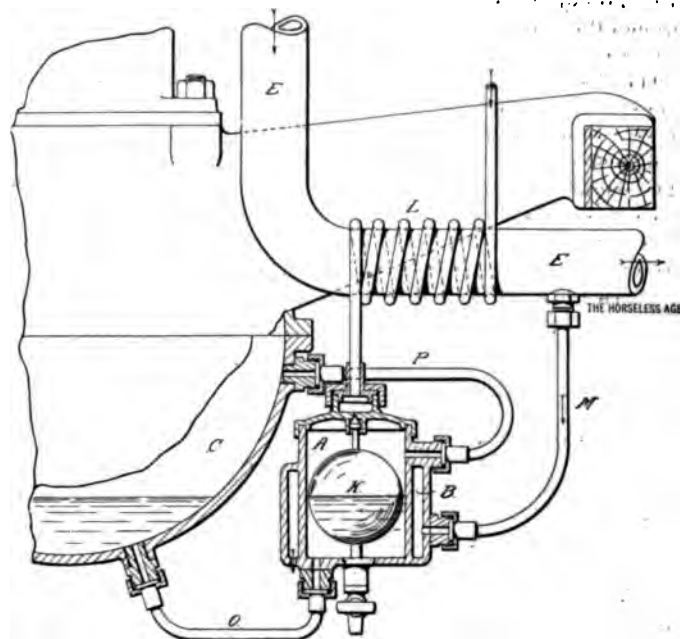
"BELGICA" AUTOMATIC LUBRICATING ATTACHMENT.
